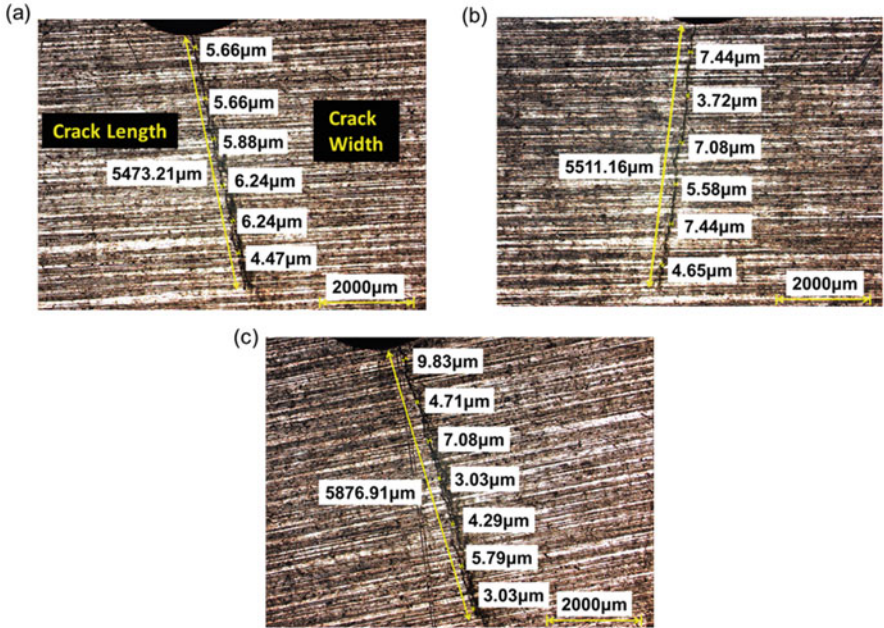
Microscopic images of the fatigue cracks in three identical aluminum specimens: (a) specimen I, (b) specimen II, and (c) specimen III [129, 130]
